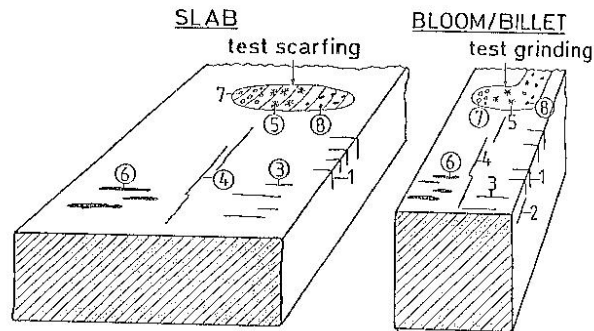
Surface cracks on a continuous cast steel slab: (1) Transverse corner cracks (2) Longitudinal corner cracks (3) Transverse cracks (4) Longitudinal cracks (5) Star cracks (6) Deep oscillation marks (7) Pinholes (8) Macro inclusions.
